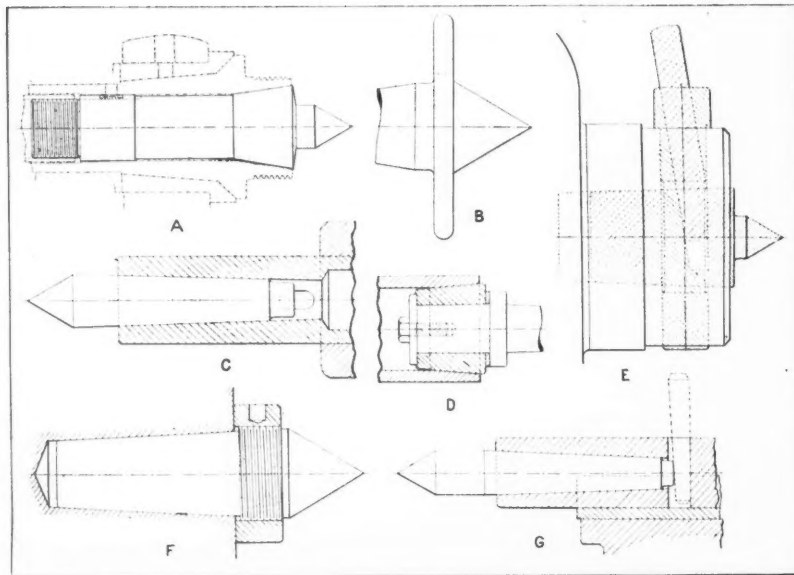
(A) Center Chuck for Bench Lathe; (B) Combined Driver and Center Plate; (C) Center Spindle with Drift Slot; (D) Revolving Center with Slight Taper; (E) Center with Special Drift to facilitate Removal; (F) Heavy Lathe Center with Extracting Ring; (G) Half-open Tailstock with Cross-hole
